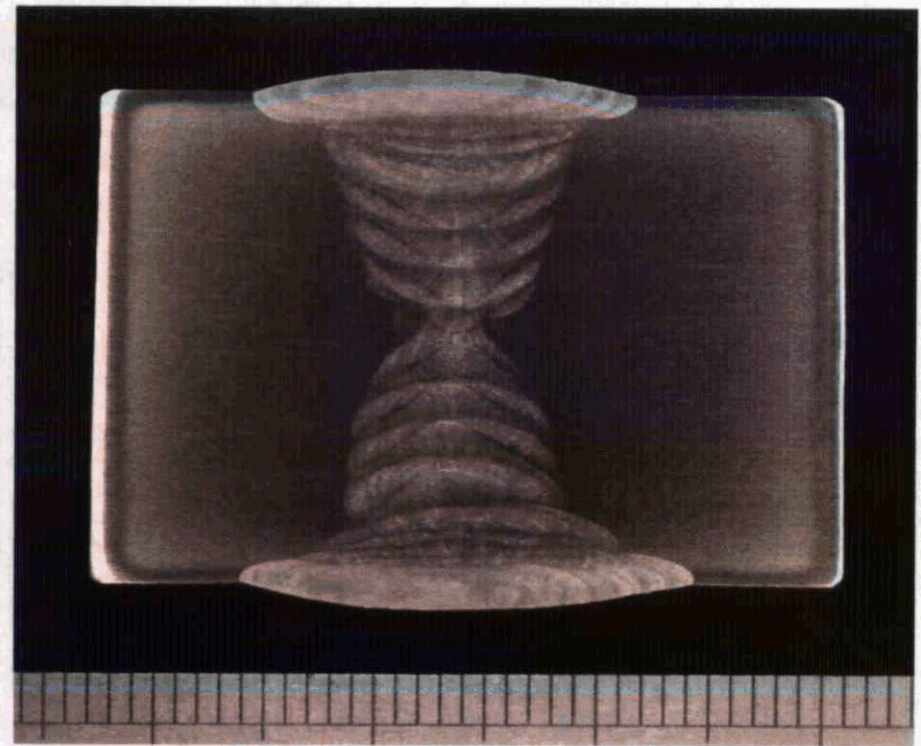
Cross-section of welded plate from which welded MCA samples were fabricated. Double-U weld was completed in 8-10 passes. The plate is 3.175 cm (1.25 inches) thick.
